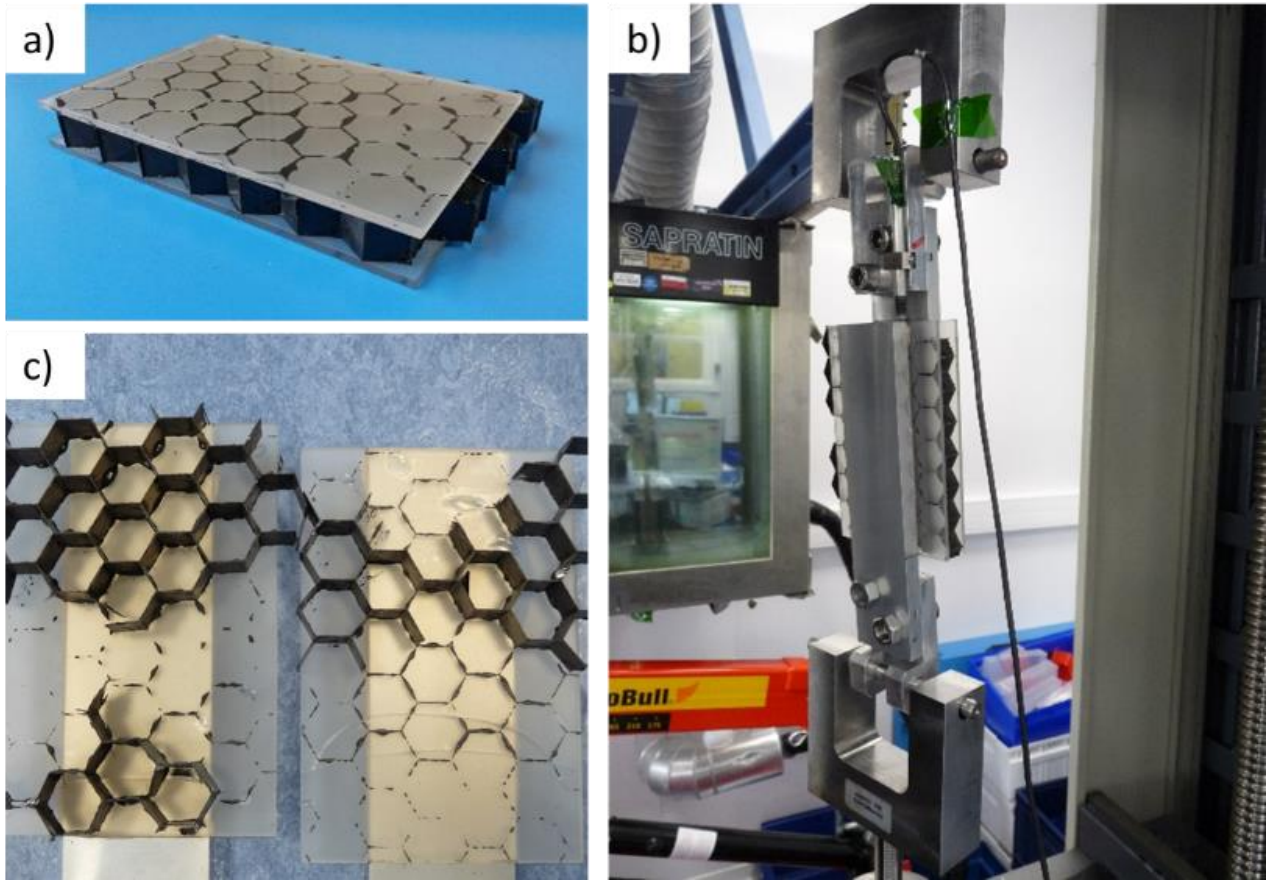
Phenolic resin bonded (PH150) Zerodur™-CFRP honeycomb-Zerodur™ sandwich assembly (100 mm x100 mm) (a) for a tensile test (b) and the fracture surface of sandwiches after a tensile test (c)
